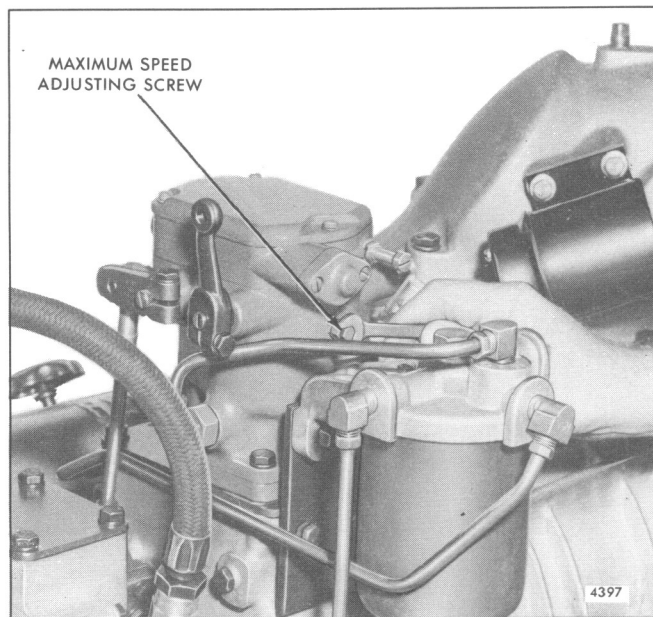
Adjusting Maximum No-Load Engine Speed
